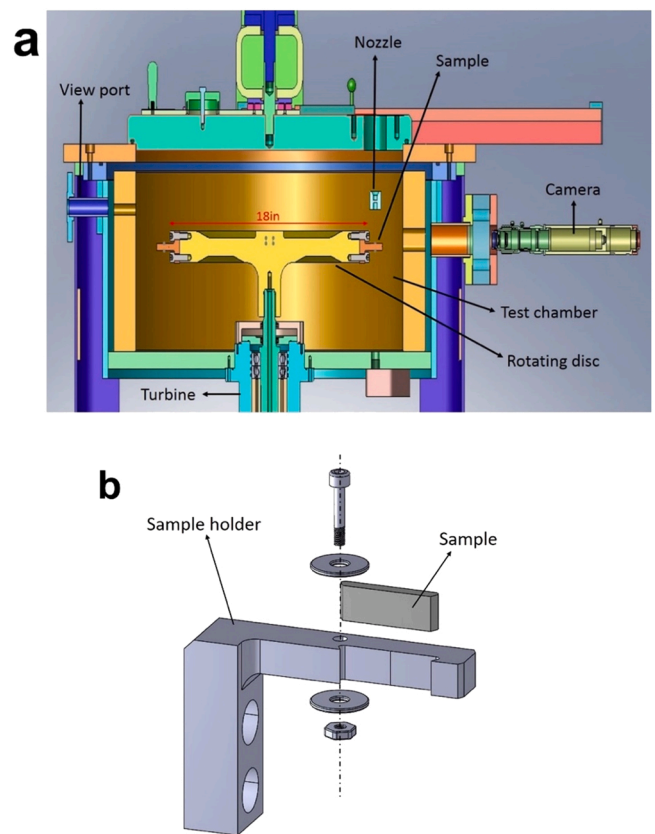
(a) schematic of erosion test rig and (b) components of the sample holder assembly.
